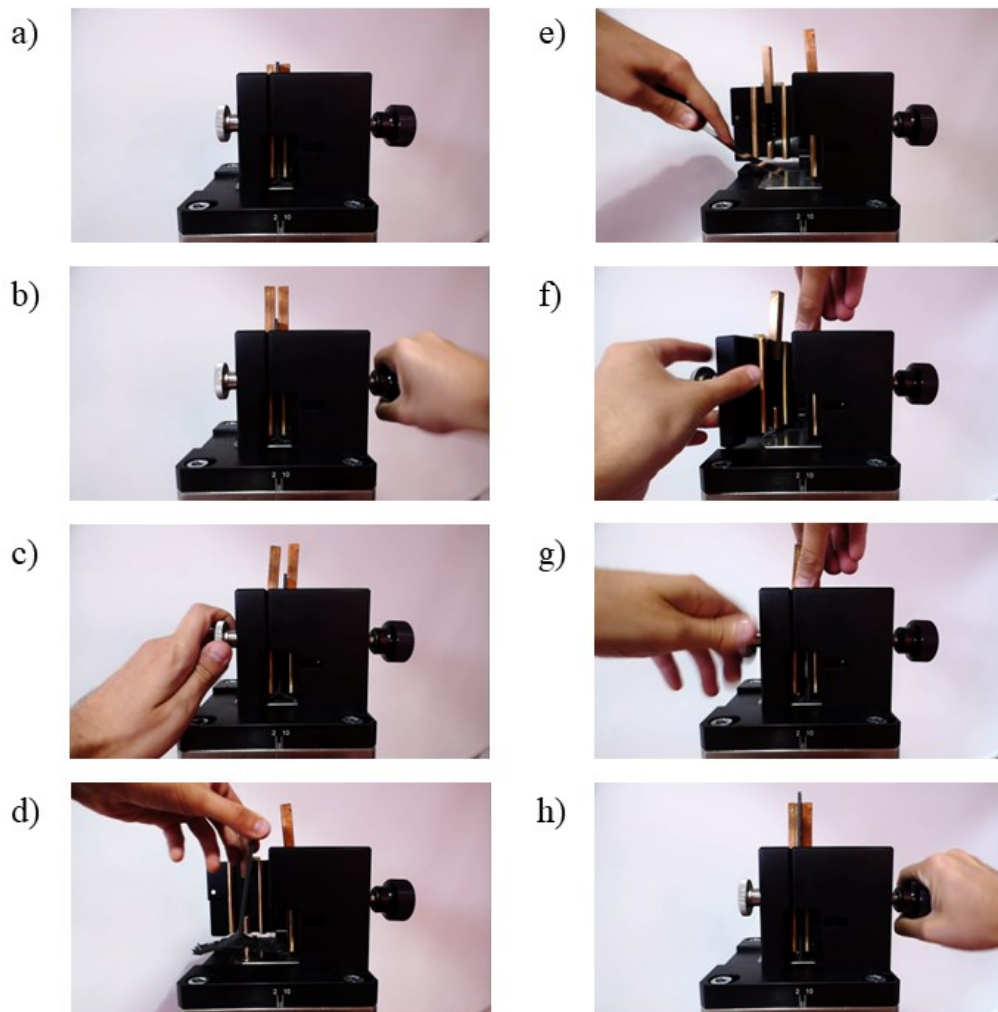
Procedure for removing a tested specimen and clamping a new one: a) fixture after the end of the test; b) unclamping the specimen rotating the handle on the right; c) opening the door on the left side; d) extraction of the specimen; e) removal of the debris and powders; f) positioning a new specimen and door closing; g) fastening the door using the handle on the left side; h) clamping the specimen using the torque-limited handle on the right side.
